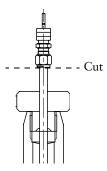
Longitudinal section through the tip of the adapter rod.
